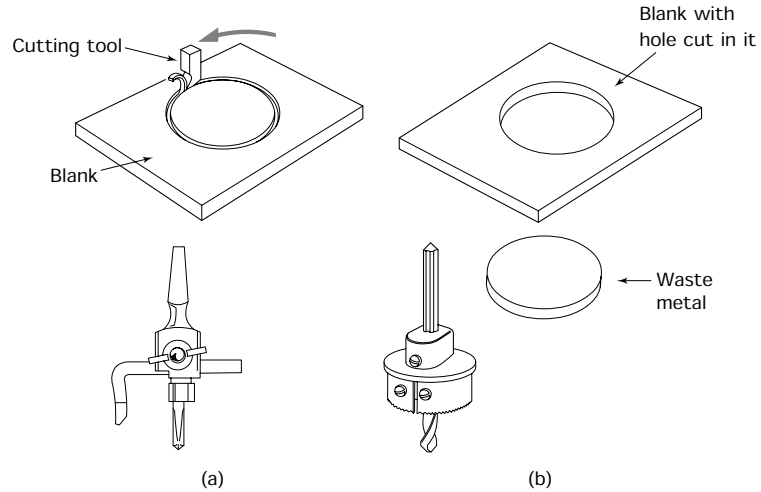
Trepanning large holes: (a) tank cutter; (b) hole saw
